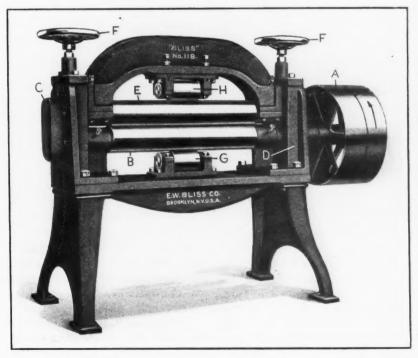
Rolling Machine Used in Removing Burrs from Edges of Flat Stock
